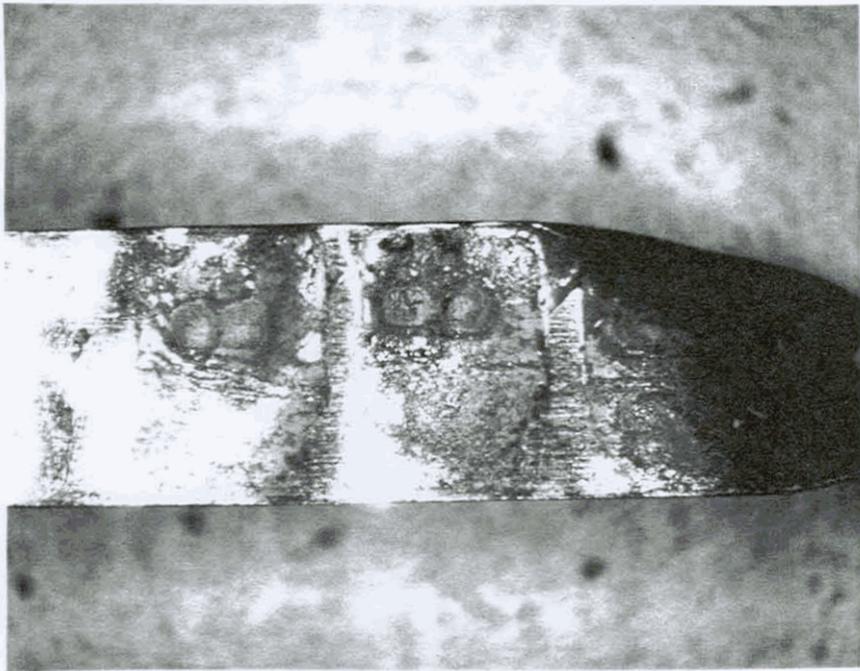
Rear side of busbar after micrometeorite had impacted and lifted the busbar and detached a weld tab. Fresh silver surface from the previous weld is completely oxidised, while the surrounding area shows much less oxidation due to the presence of a silicone contaminant on the surface.
